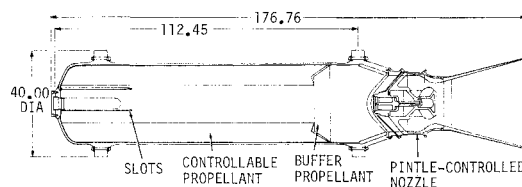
Cross-sectional drawing of thrust vector control gas generator.
